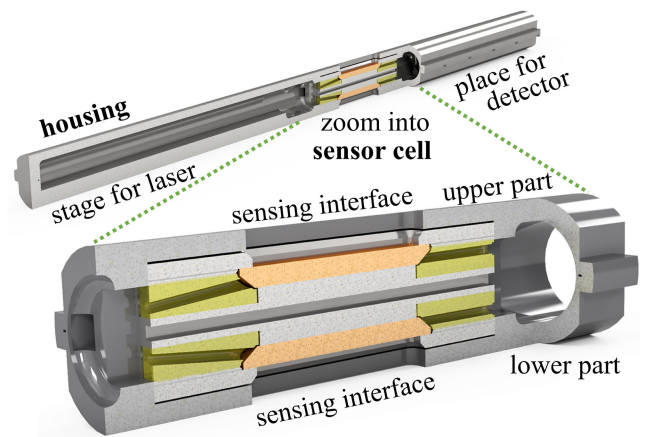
IR-ATR transducer assembly inserted into the system housing. The system housing comprises two hemi-cylindrical parts sealed via an O-ring with an outer tube diameter of 5 cm after assembly.
